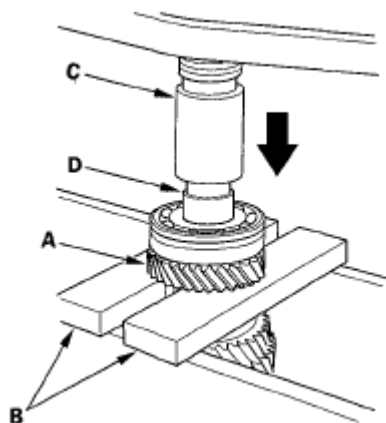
Identifying 6th Gear, Steel Blocks, Press And Attachment
